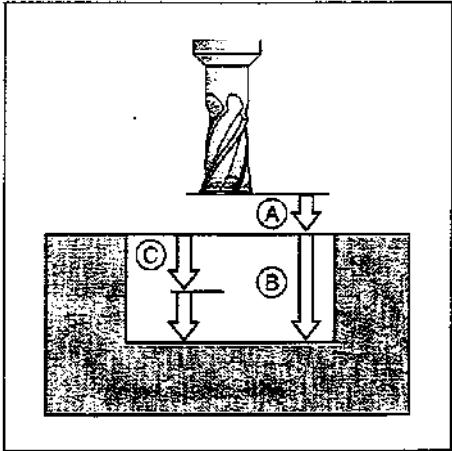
Infeeds and distances for the POCKET MILLING cycle
